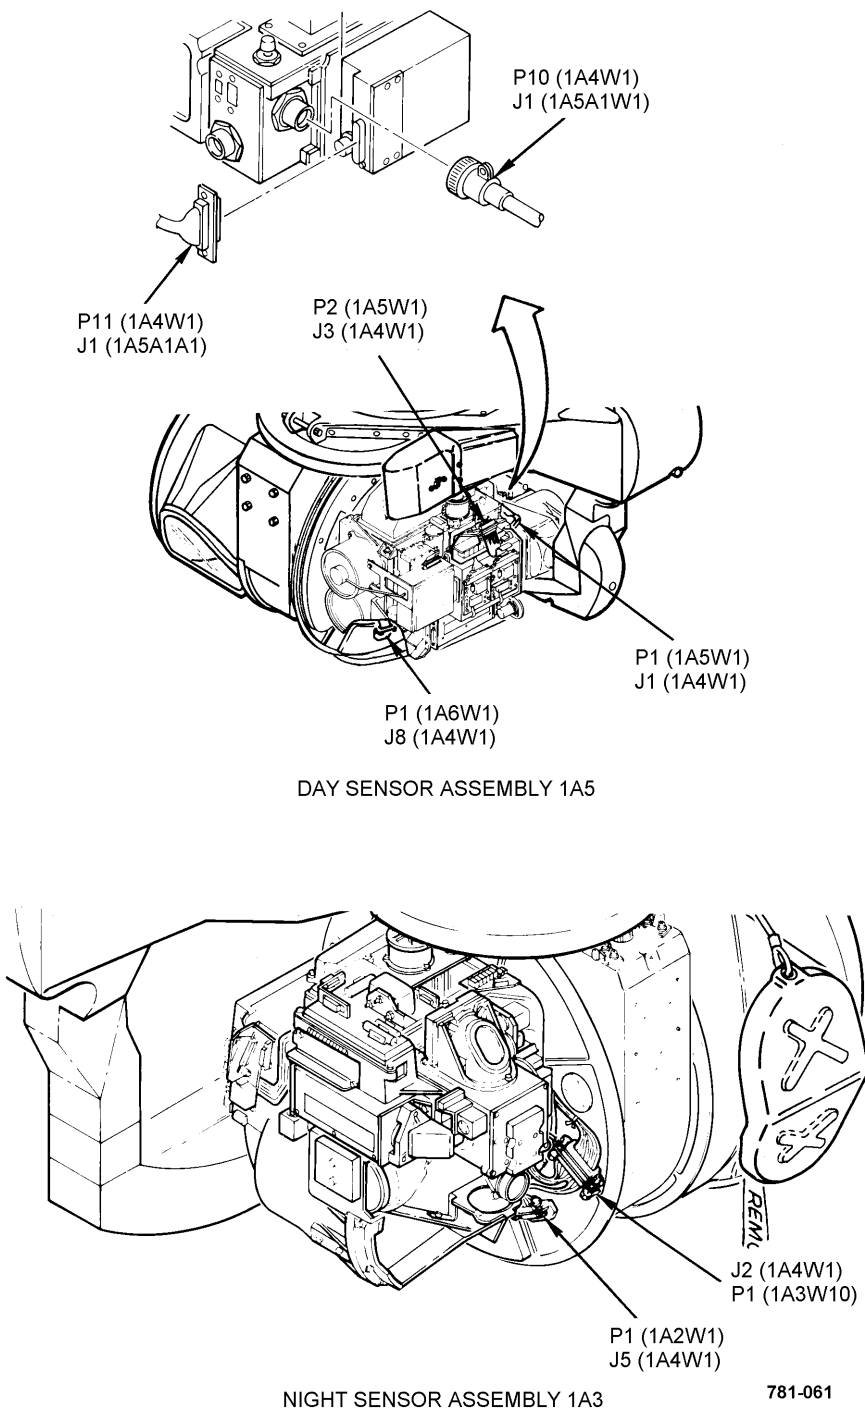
Day Sensor Assembly 1A5 and Night Sensor Assembly 1A3 Connector Locations
